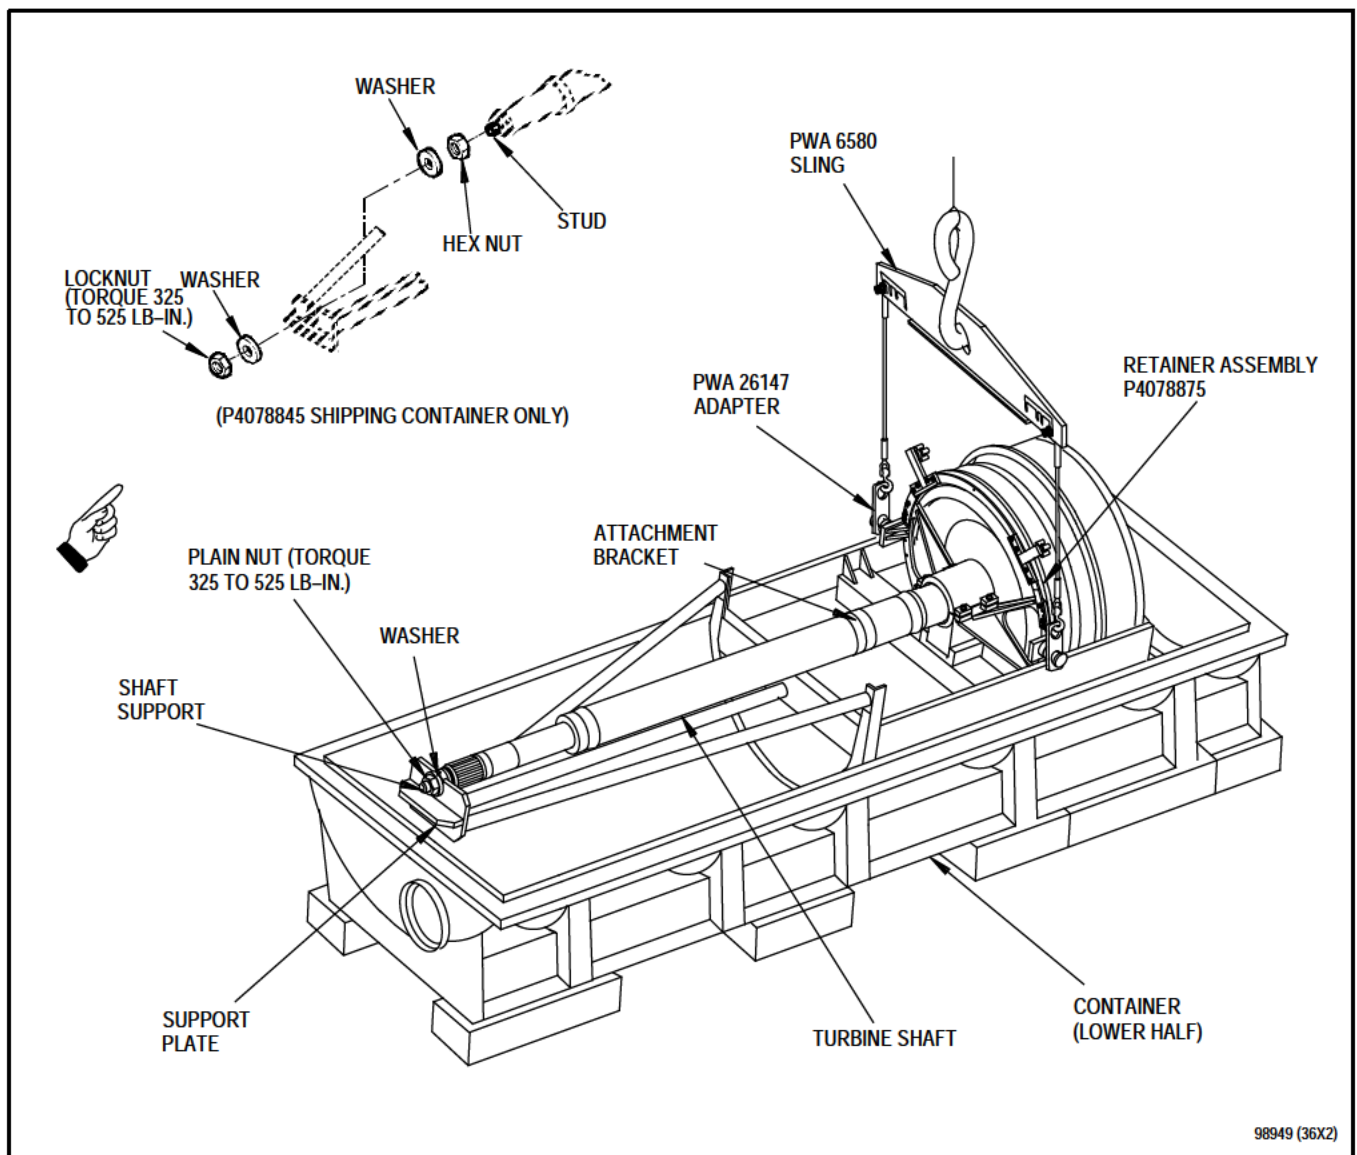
Installation of Fan Drive Turbine Module into Shipping Container
